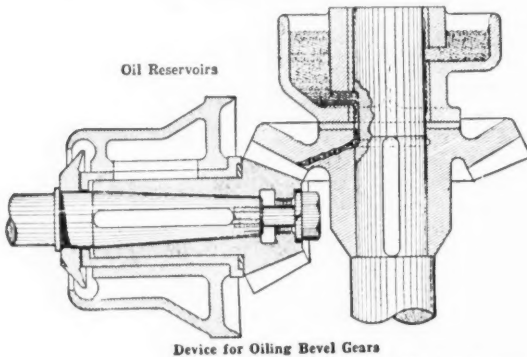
Oiling plan for the bevel gears on a continuous coal cutting machine. Oil reservoirs in the top bearing of the intermediate shaft serve both the shaft bearing and gears through oil passageways as shown.
